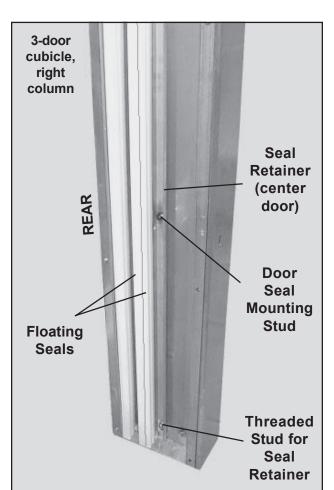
Floating Seals and Seal Retainer for Center Door in Place
